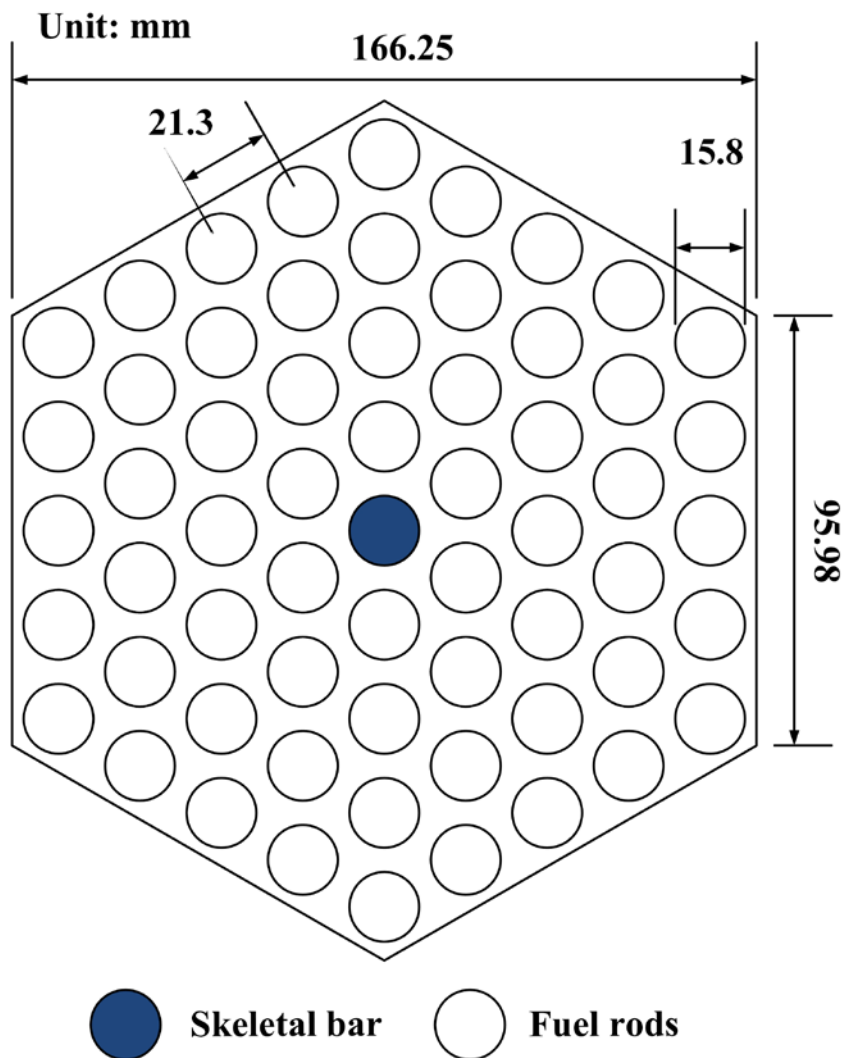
Horizontal view of a single fuel assembly including fuel rods and a central skeletal bar
